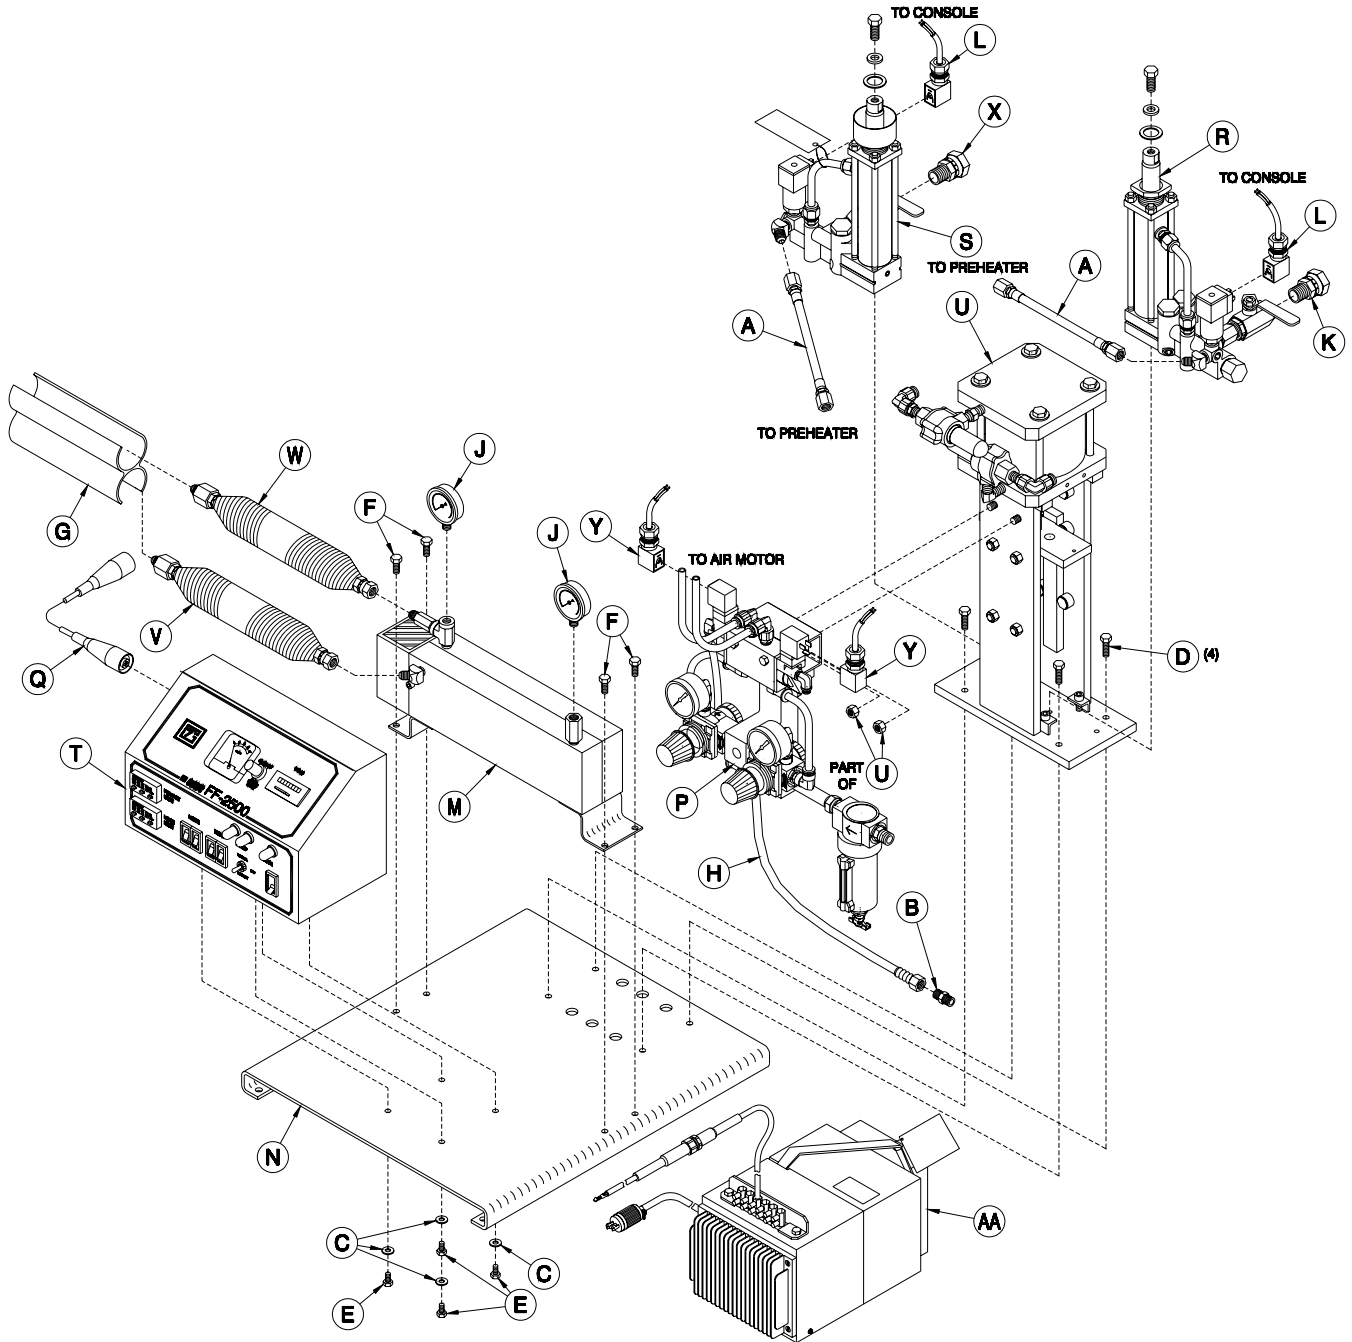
FF-2500 Assembly (Part No. 25000-SIZE), Exploded View
